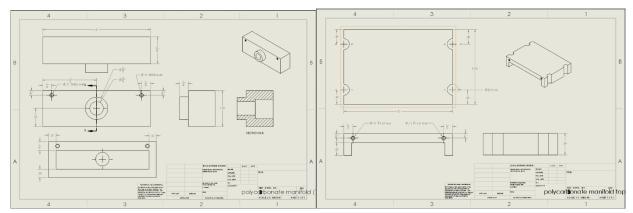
Engineering Drawings for the Housing Unit. The gasket is placed between the housing unit and the cold plate.
